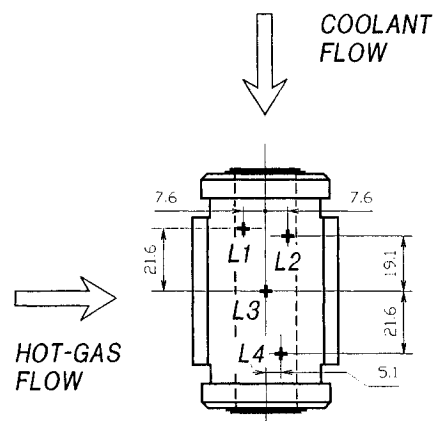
Location of heat transfer sensors on the test module; the thin-film sensors are located on both external and internal surfaces (dimensions in millimeters).
